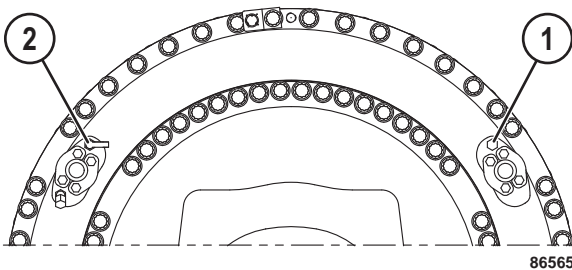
BRAKE WEAR INDICATOR INSTALLATION
